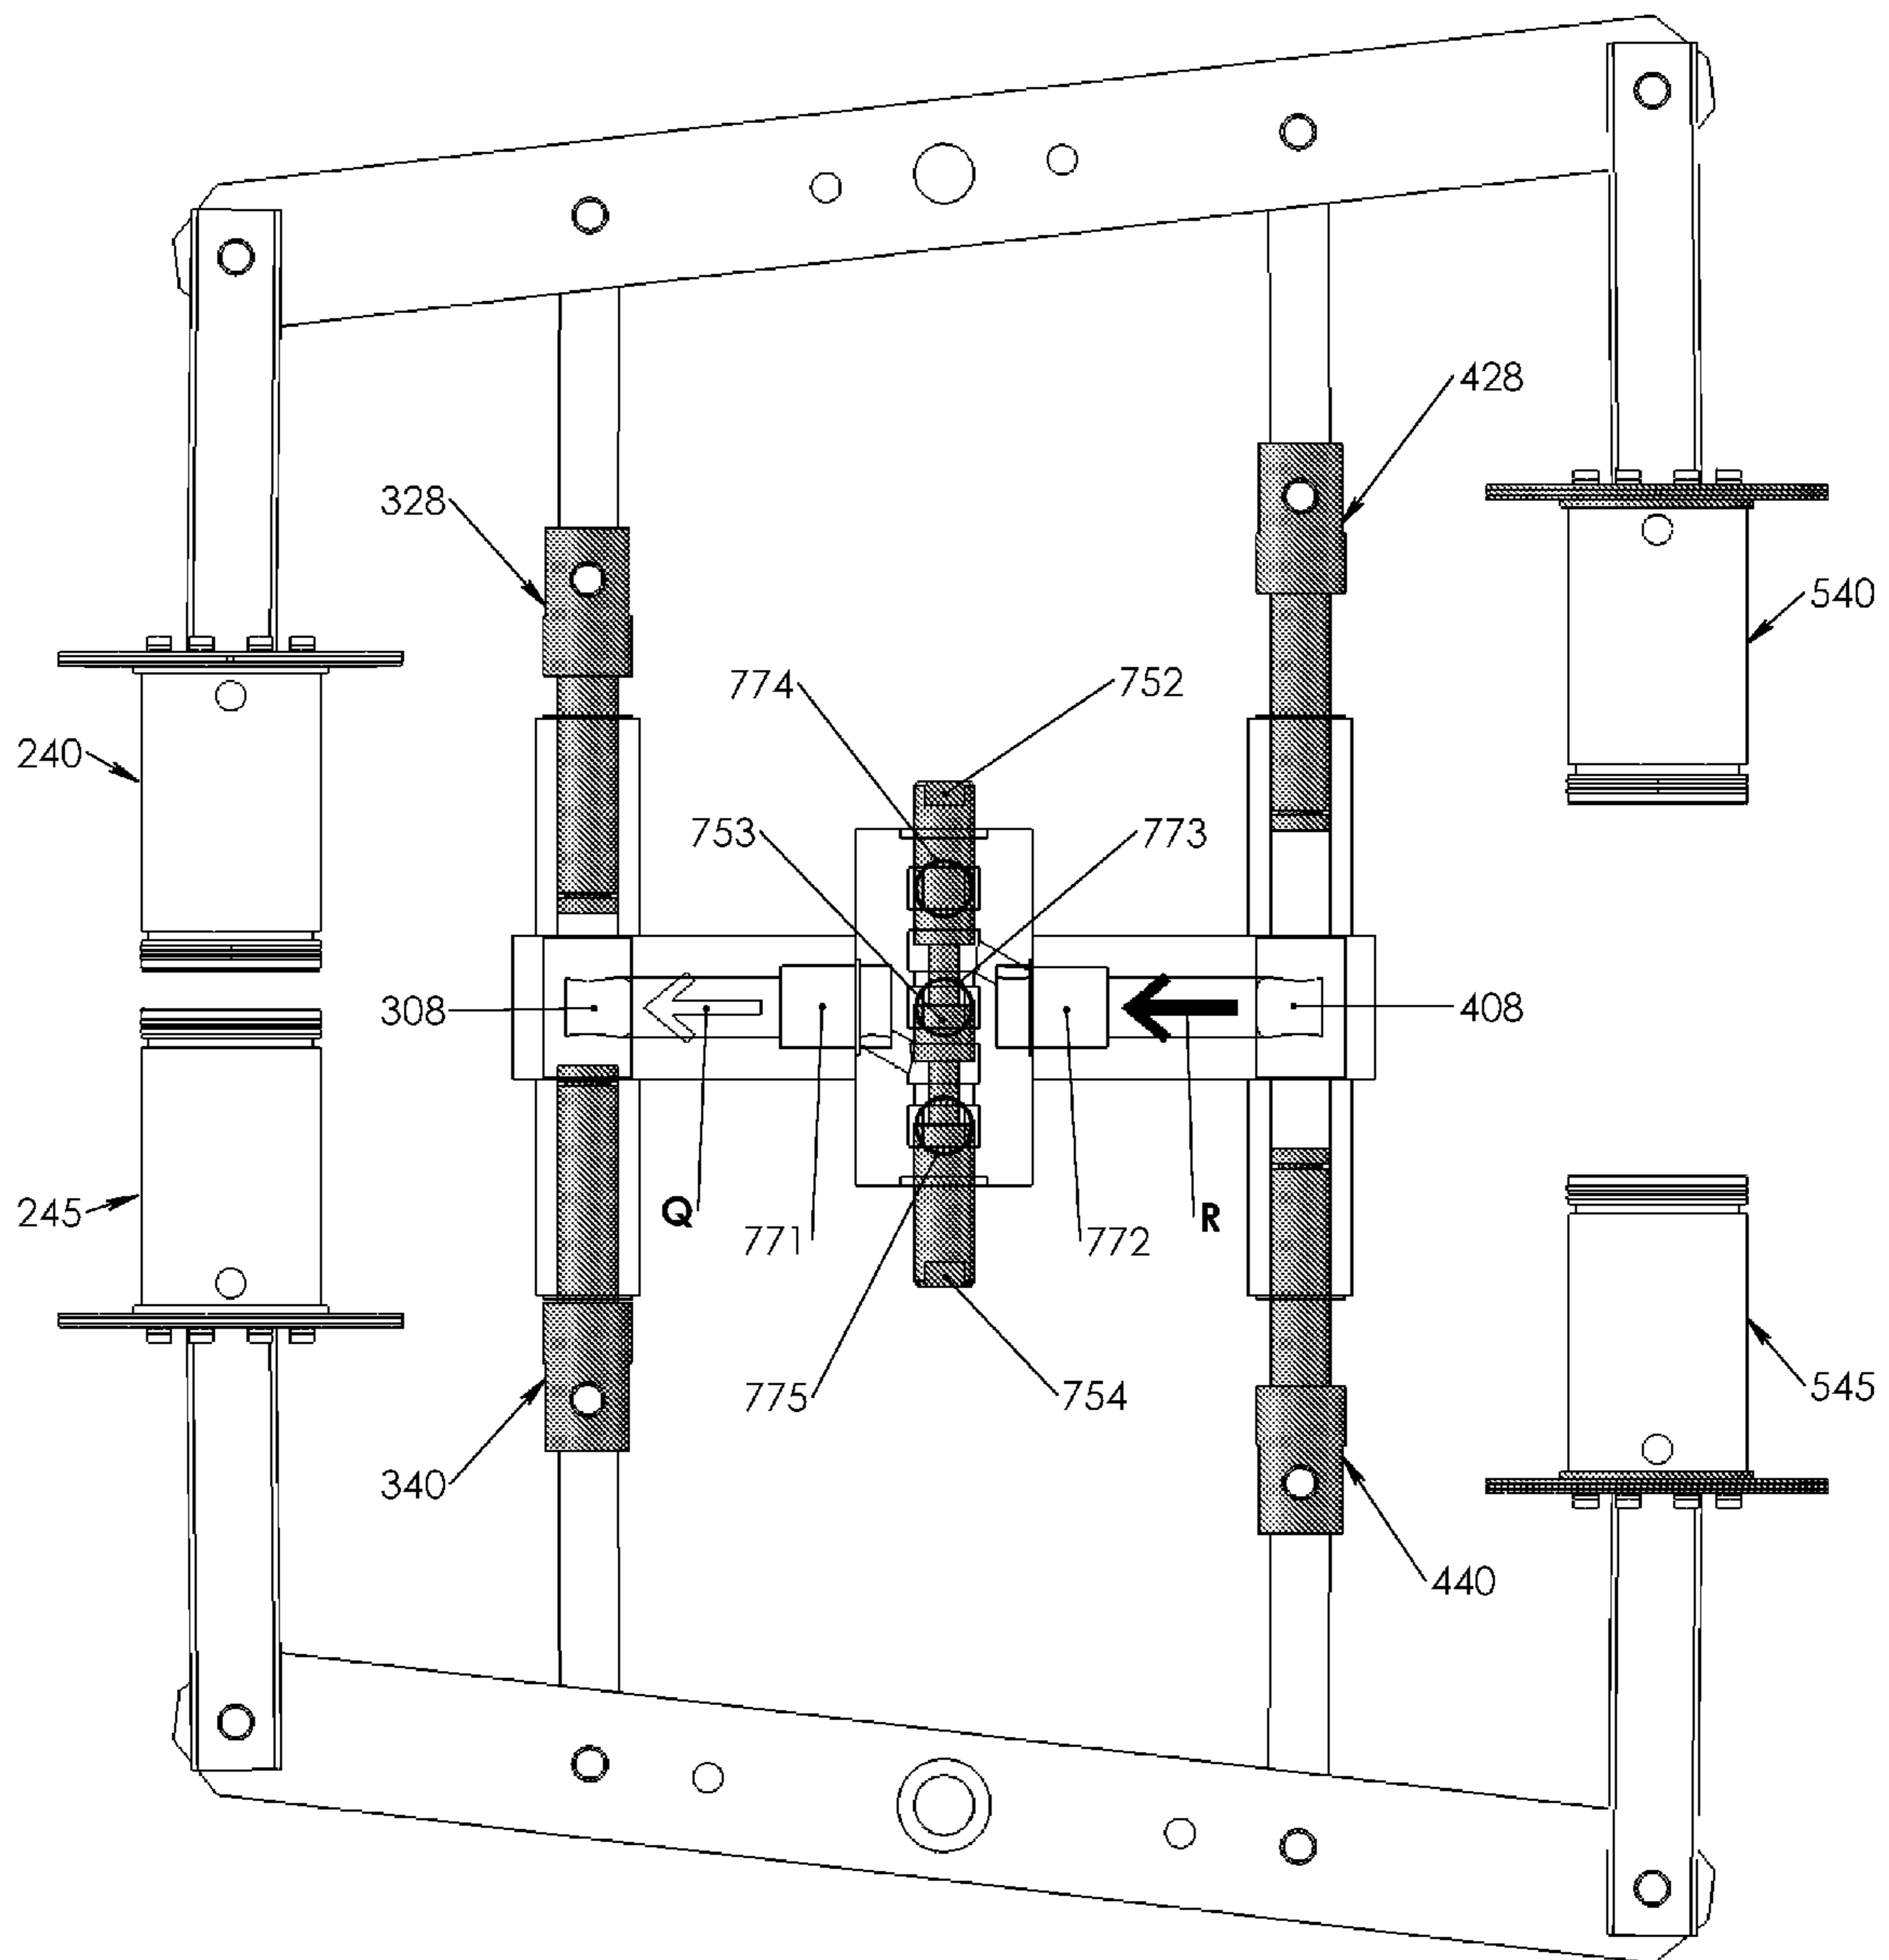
B. B-SIDE ACTUATOR ASSEMBLY
